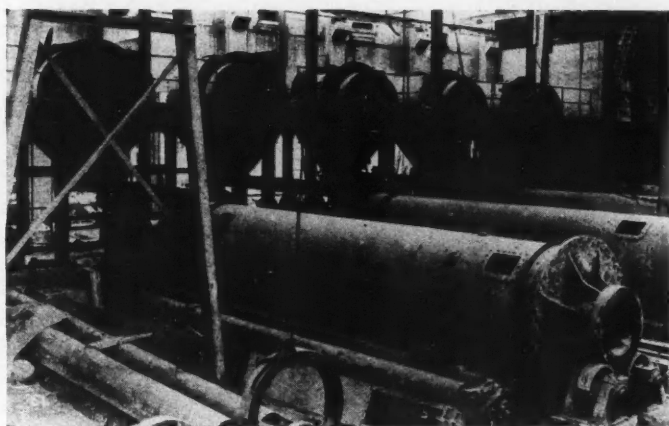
Grinding Mill, showing Ball and Tube Mills during Erection.
